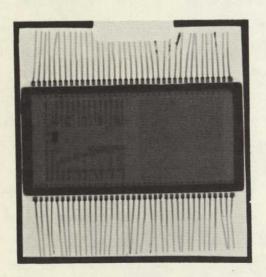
X-ray photograph of specimen No. 20 showing contaminants:
